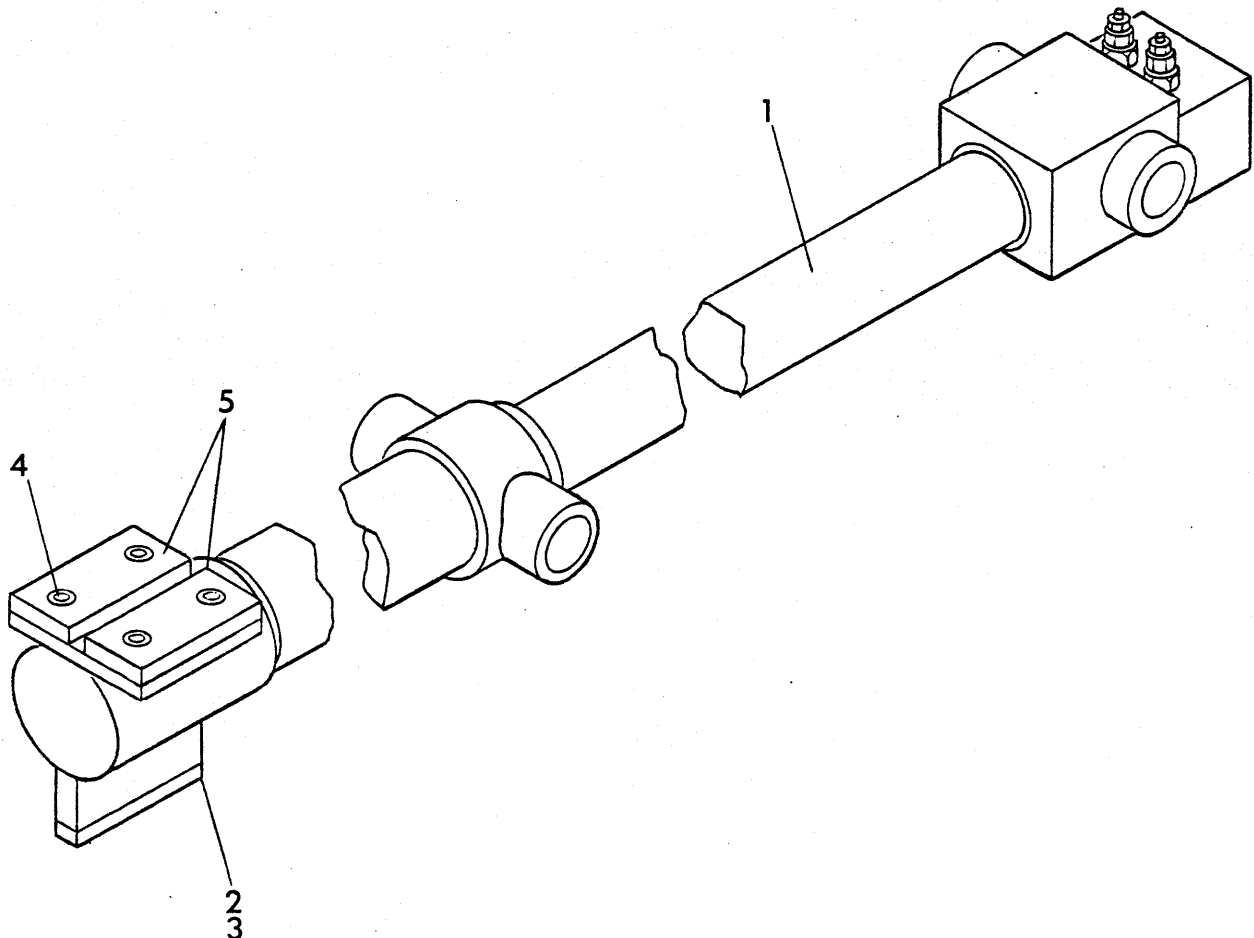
A - BOOM EXTENSION CYLINDER (50)
